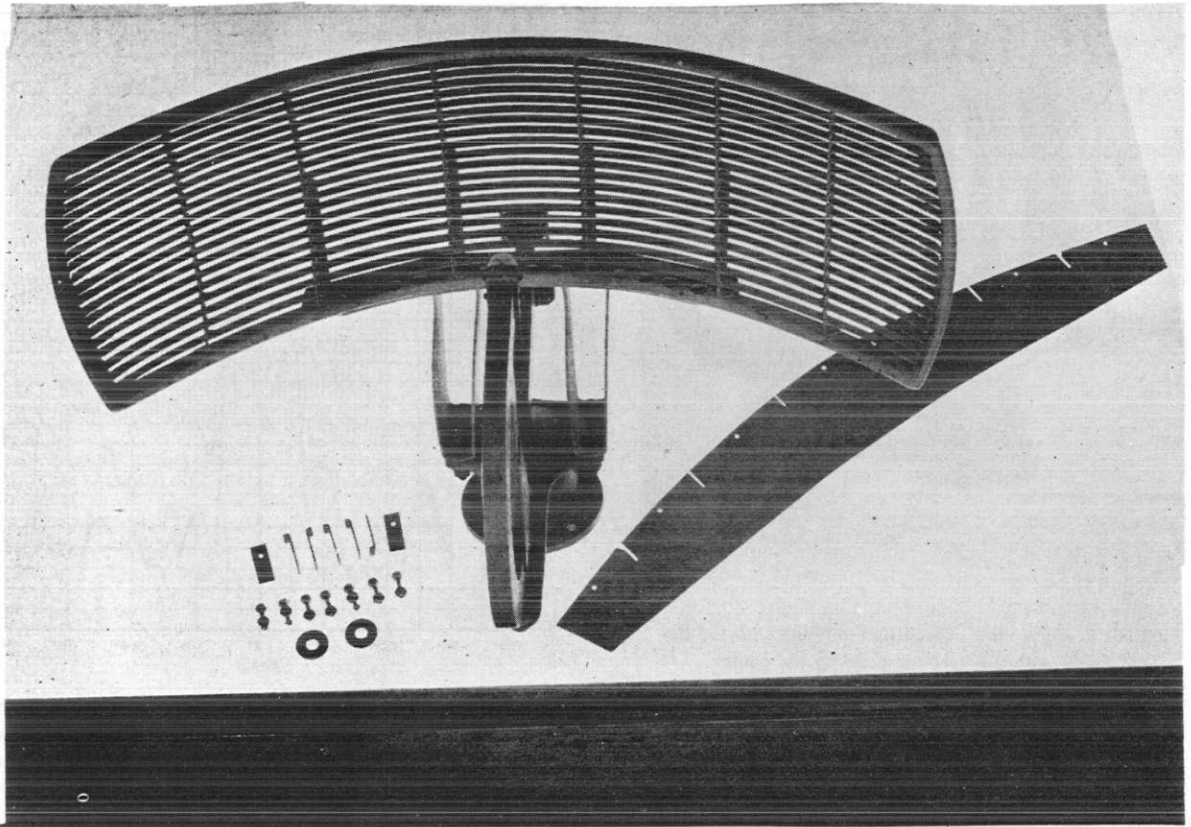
Disassembled view of modified SO-3 antenna. The new reflector strip is shown to the right and mounting hardware to the left. The tapped screw holes along the bottom rim of the main reflector should be disregarded as they are not used in the final strip attachment.
